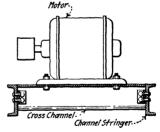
A motor, with its shaft perpendicular to the stringers, fastened to two cross channels.
